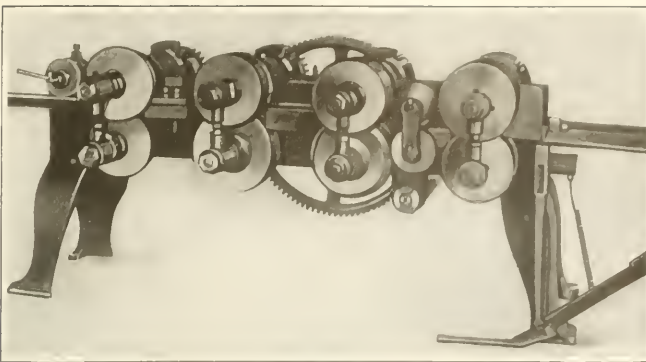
Eight-roll Channeling Machine as viewed from Roll Side
